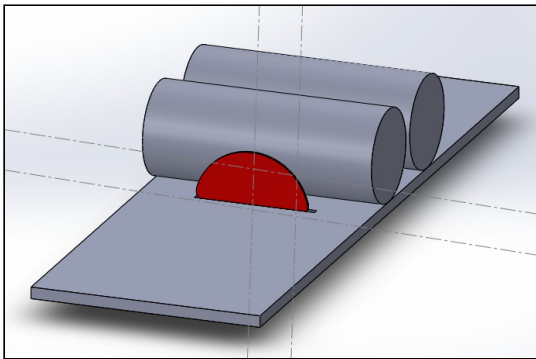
Paddle servo attachments, with dimensions measured in millimeters.
